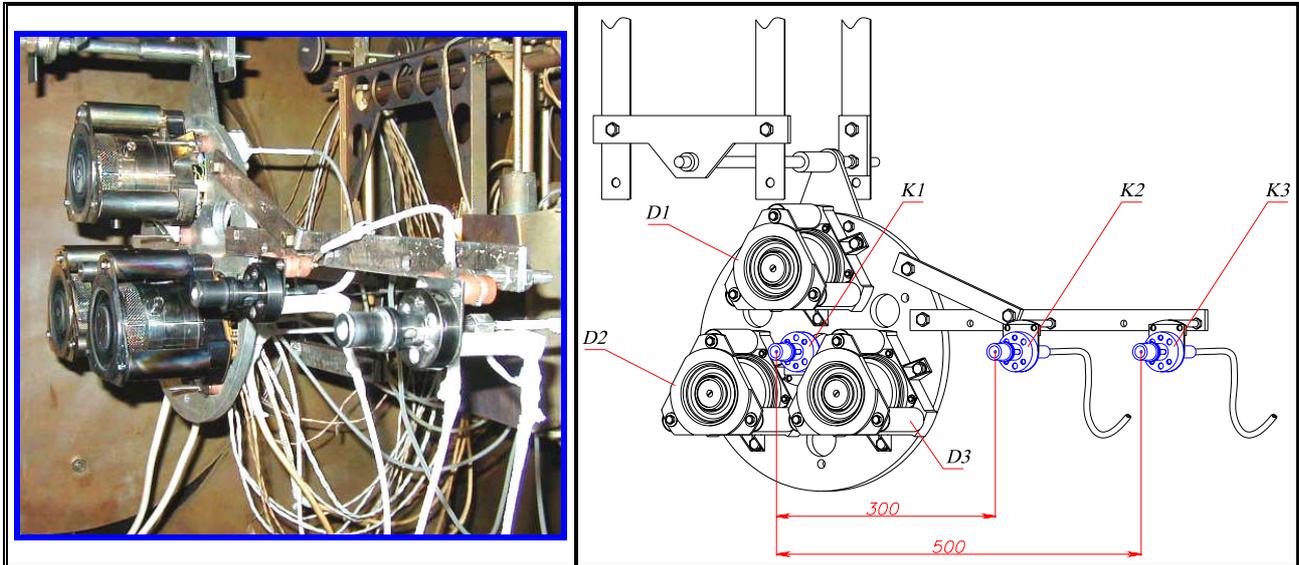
General view of the D-55 thruster assembly with three cathodes.
